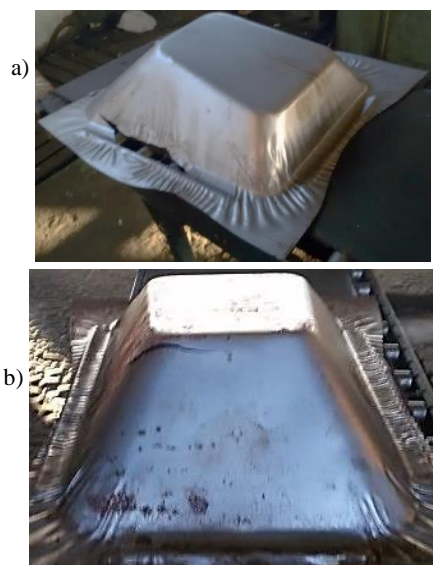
Lateral tear and frontal rupture on DD14 steel sheet deep drawn parts.
